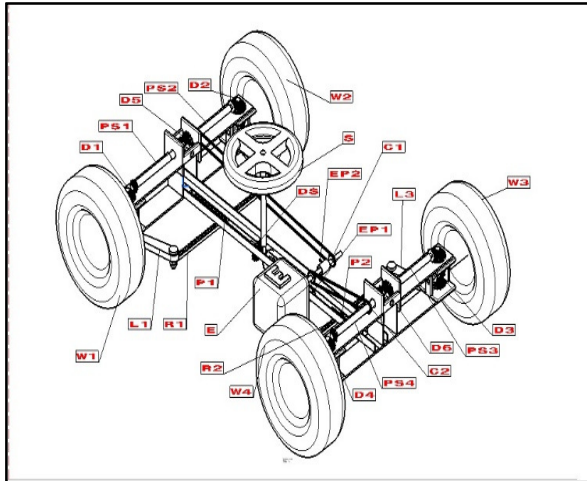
Schematic diagram of the modified chassis with proposed mechanism.
